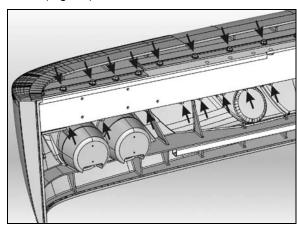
ALUMINUM EXTRUSIONS - BUMPER SKIN REMOVAL
